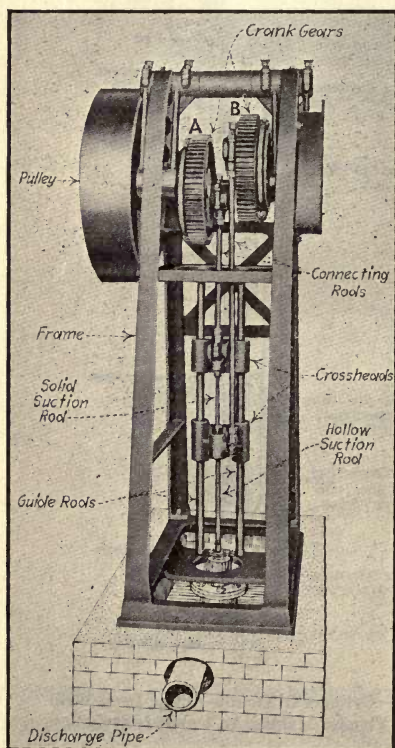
Chippewa Power-Driven Deep-Well-Pump Head Or Operating Gear.
